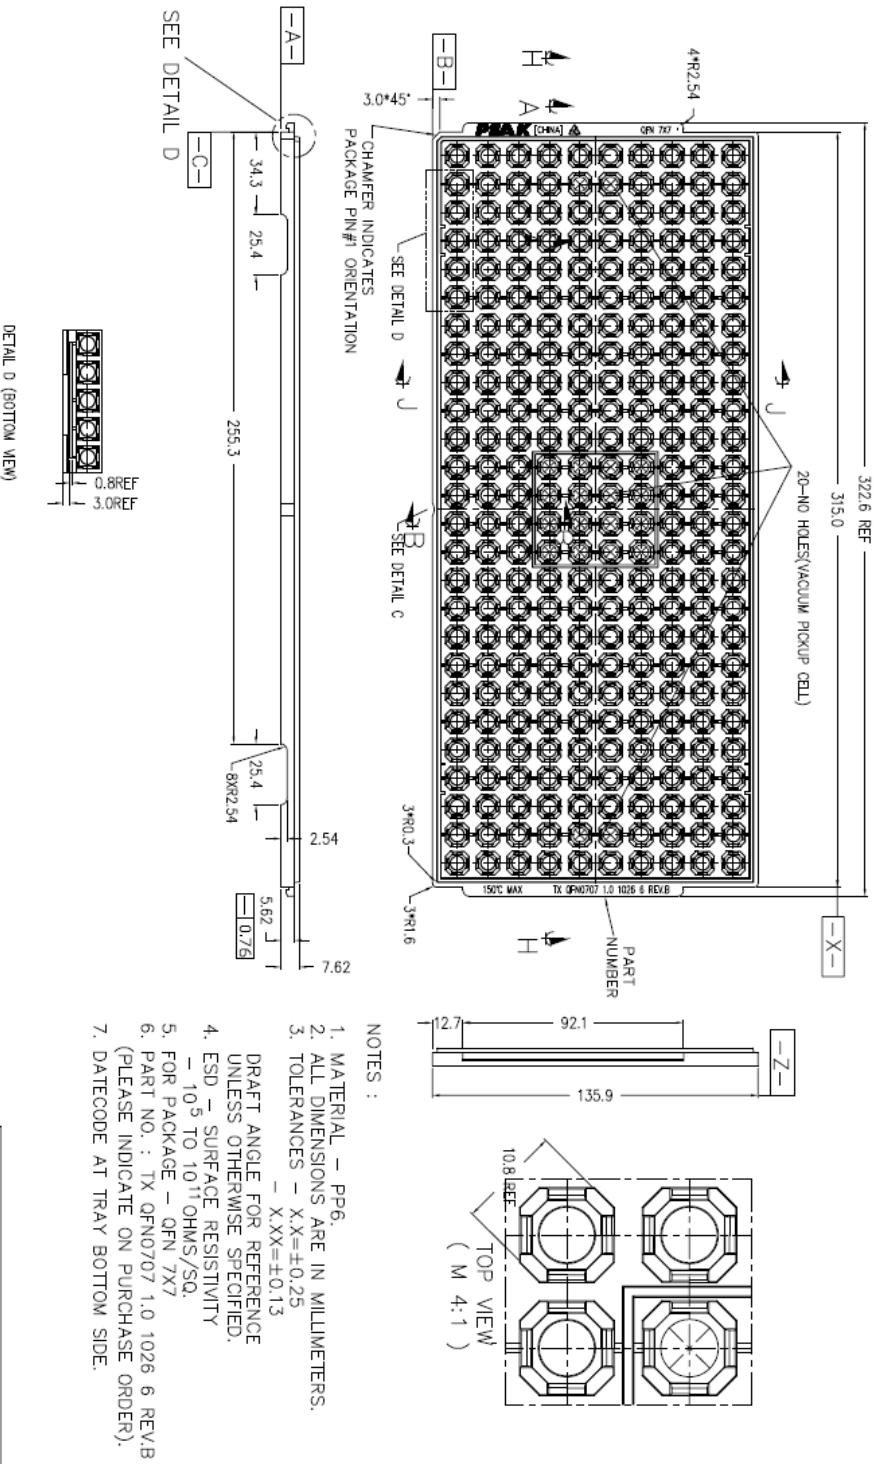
VNC2 – QFN-32 and FT311D QFN Tray Dimensions
